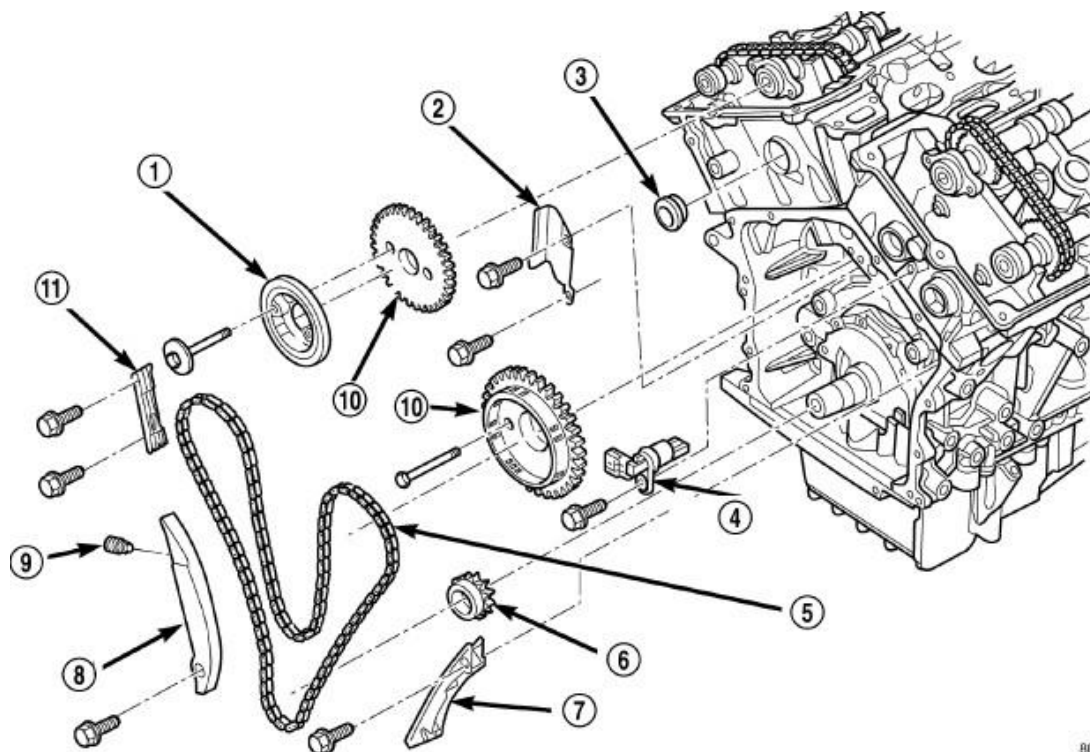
TIMING DRIVE SYSTEM - PRIMARY
